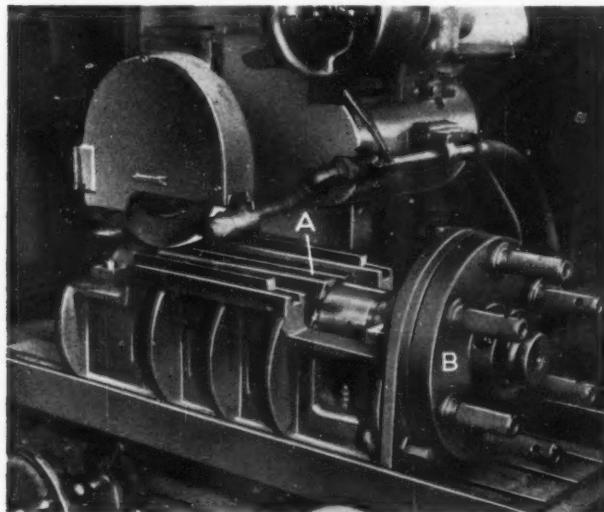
Set-up on a Surface Grinder for Finishing the Faces and Tenon Grooves of the End Working Tool Slide of a 1-in. Capacity, 6-spindle Automatic
